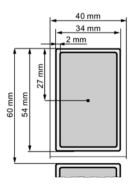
SIMATIC RF630L 6GT2810-2AB03 dimension drawing
